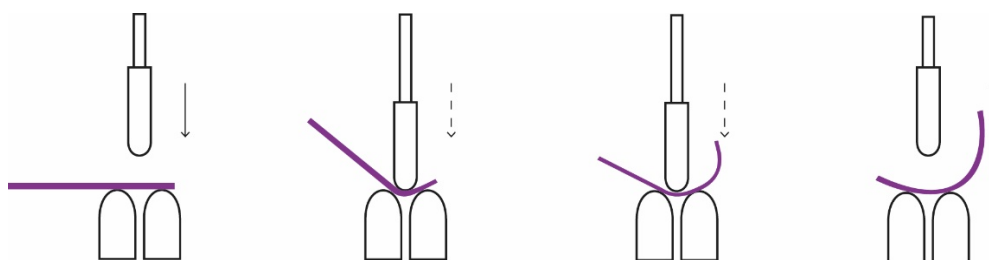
Principle of press forming, similar to roll forming (then a roll is used to continuously press the surface).
